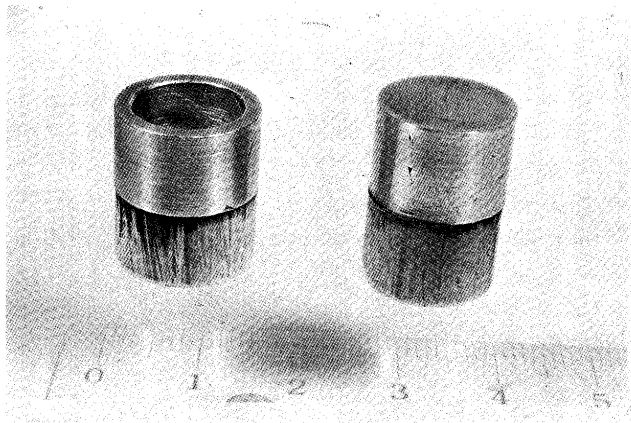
Butt joint of Al_2O_3 rod with copper rod (right), and butt joint of Al_2O_3 cylinder with copper cylinder (left). The upper and lower parts in the specimens are copper and Al_2O_3 , respectively.
